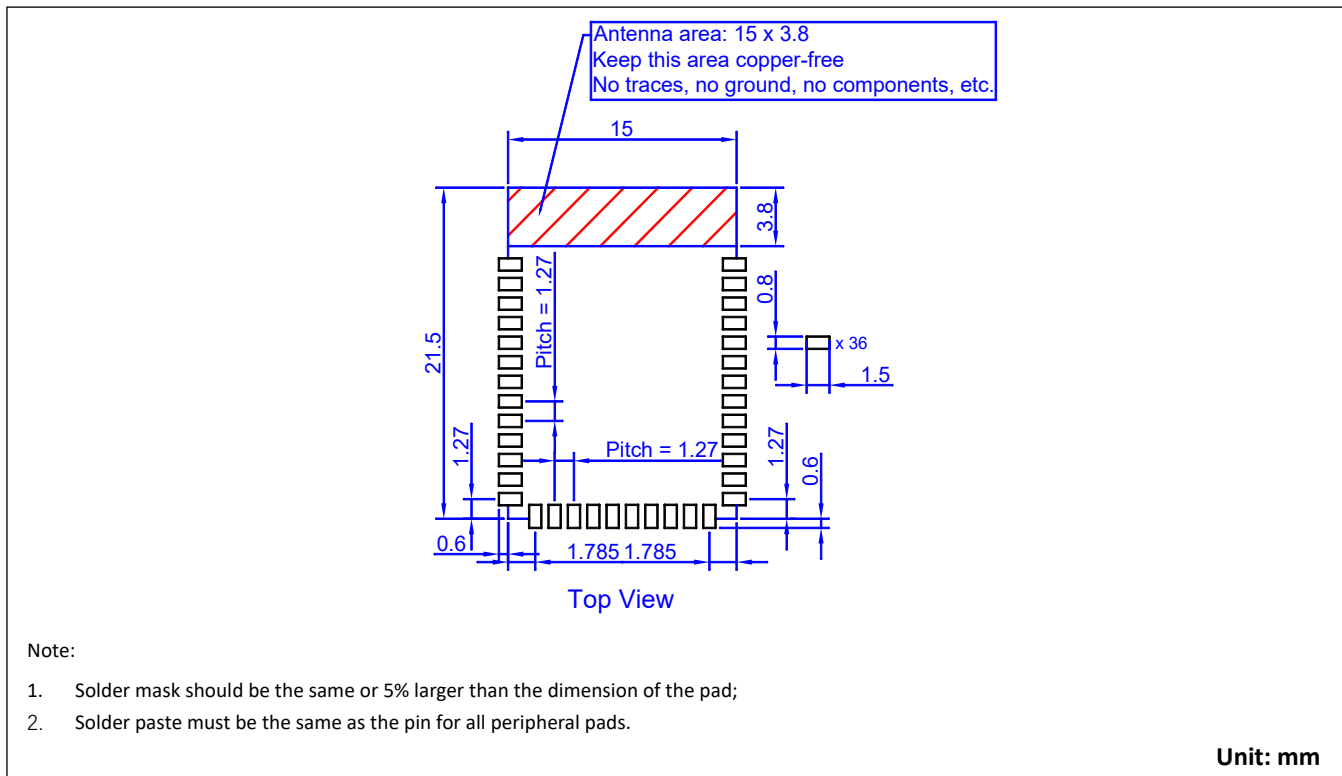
Recommended Module Footprint of BDE-MP26R_A
